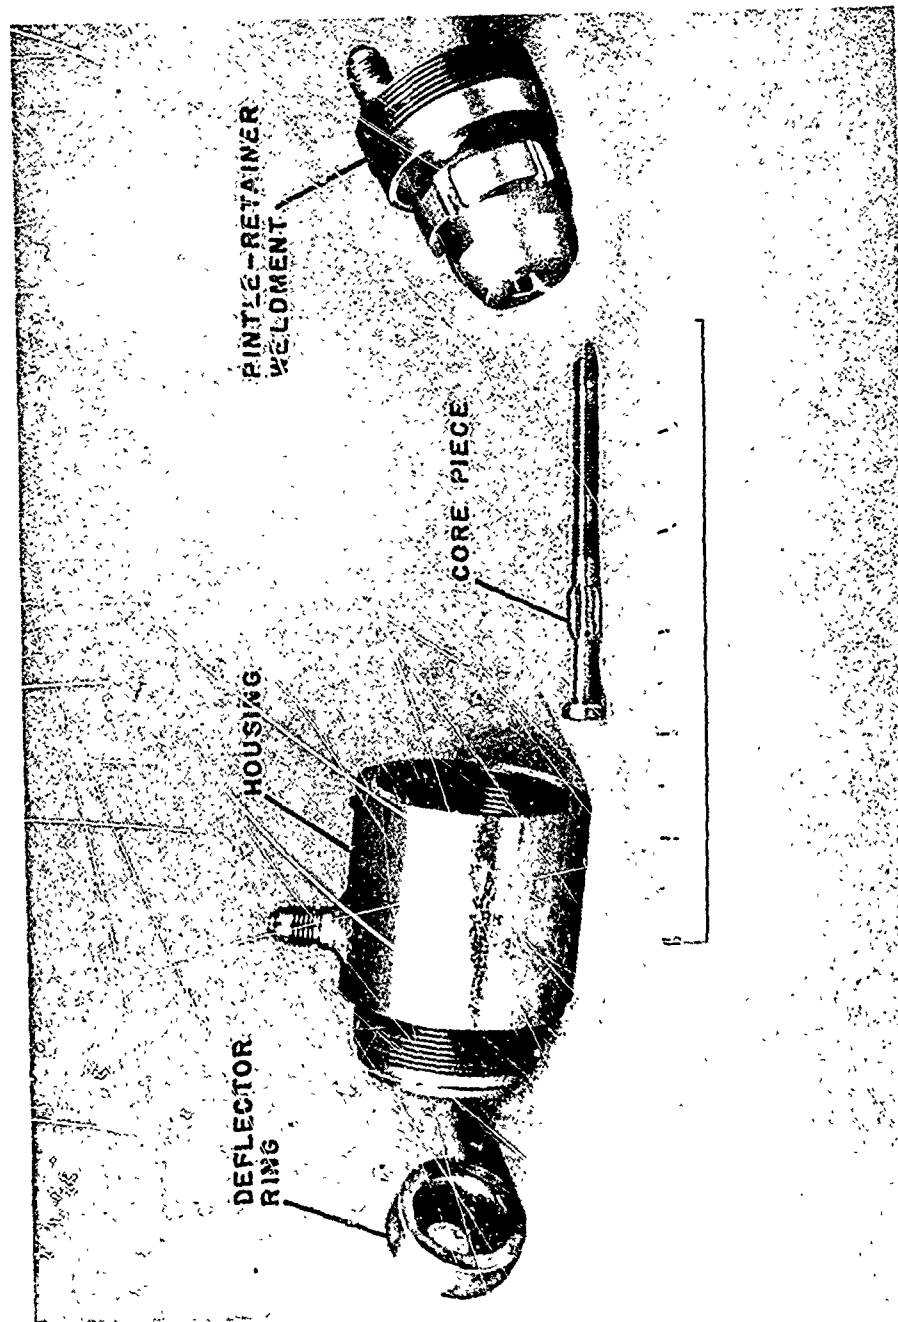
Exploded View of Packrat II Gas Generator Variable-Area-Injector Hardware.
